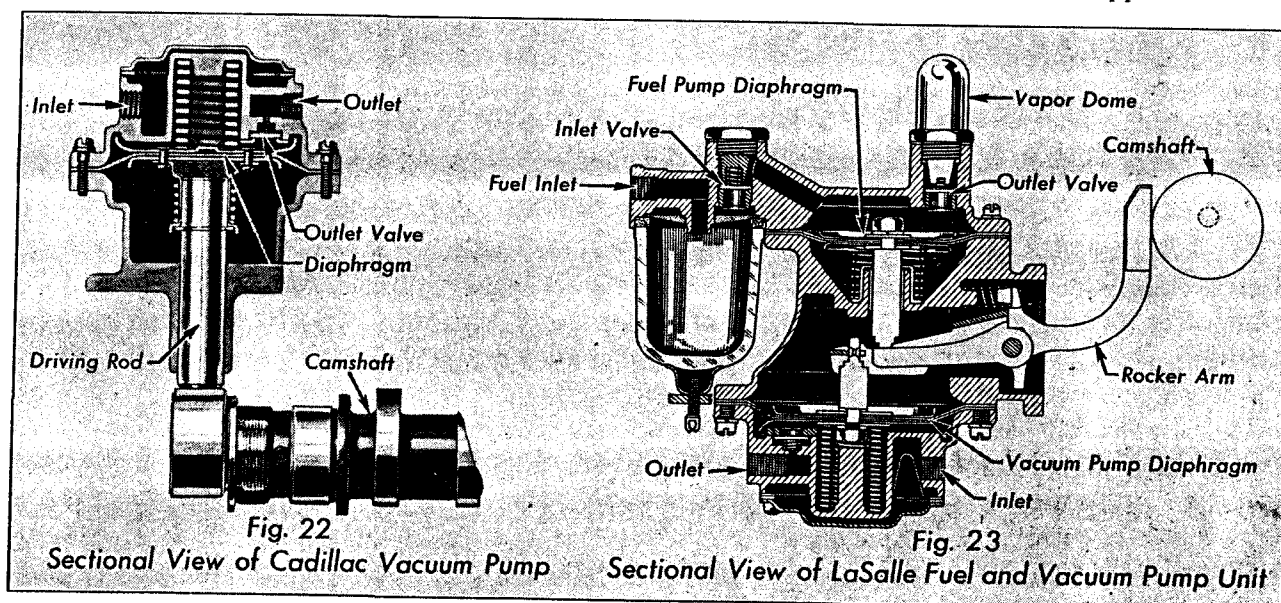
Sectional Views of Cadillac Vacuum Pump and LaSalle Fuel and Vacuum Pump Unit
